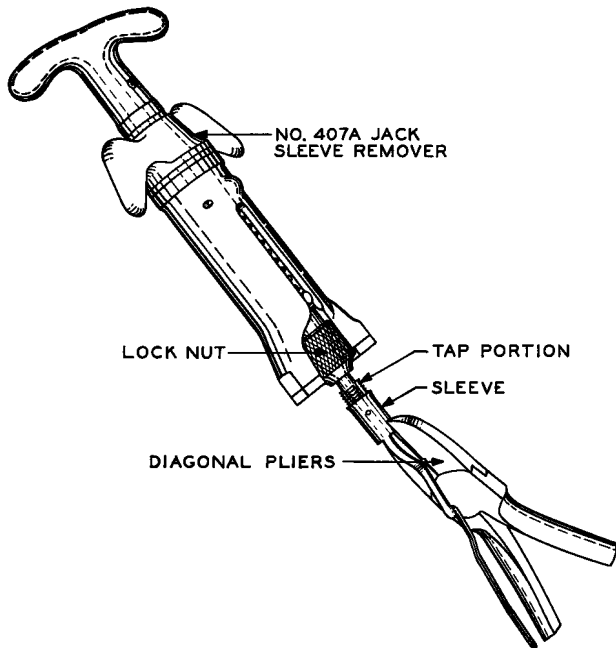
Method of Removing Sleeve From 407A Sleeve Remover
